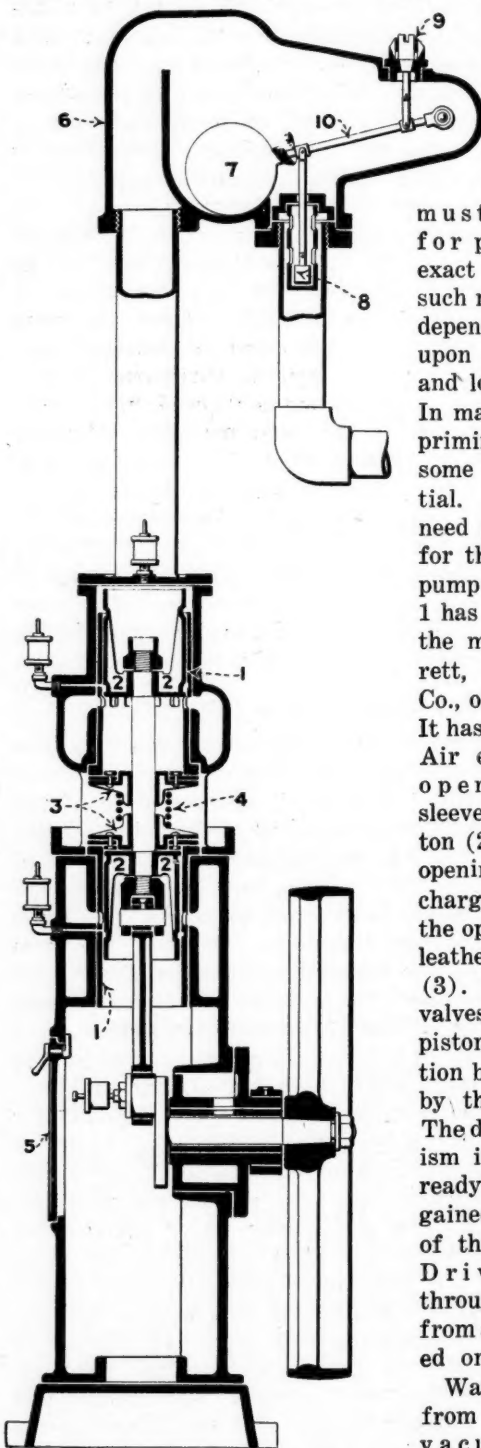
CROSS-SECTION OF PUMP PRIMER
